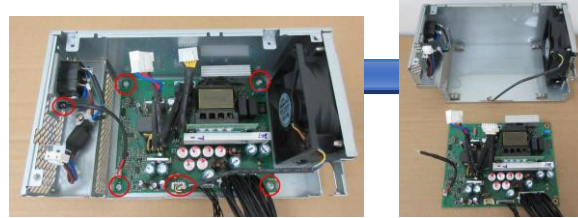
Identity PCBA > 10 cm<sup>2</sup> for further treatment (MAIN board: 160.923 cm<sup>2</sup>).
